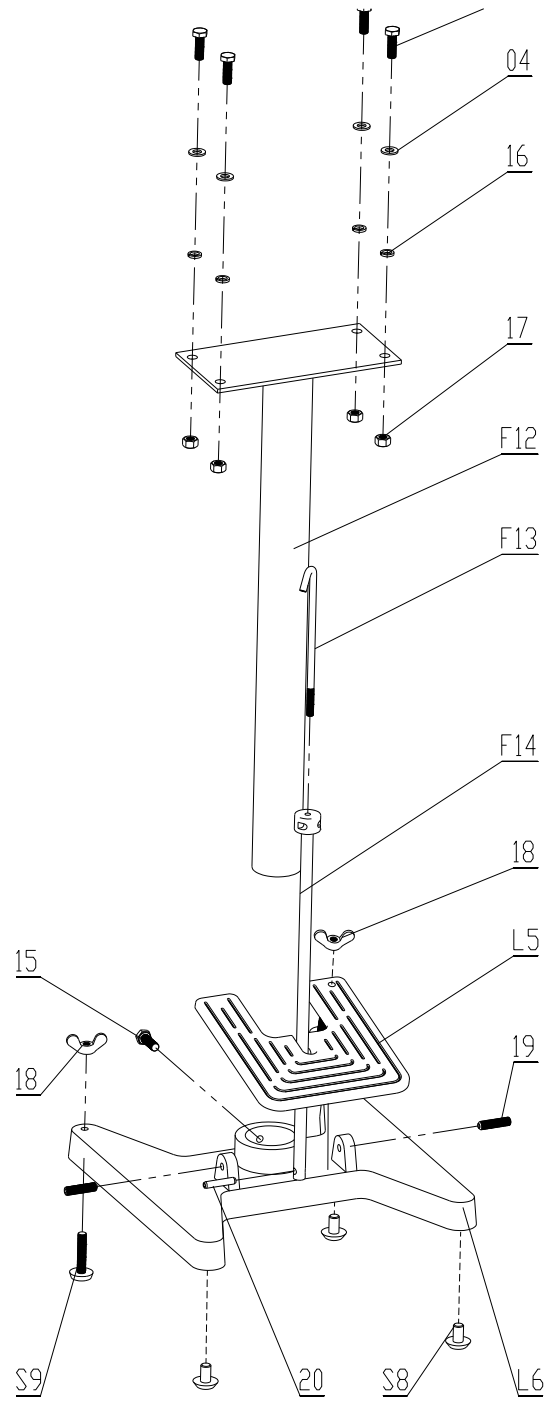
Axonometric Drawing of the Instant-heat Type base
